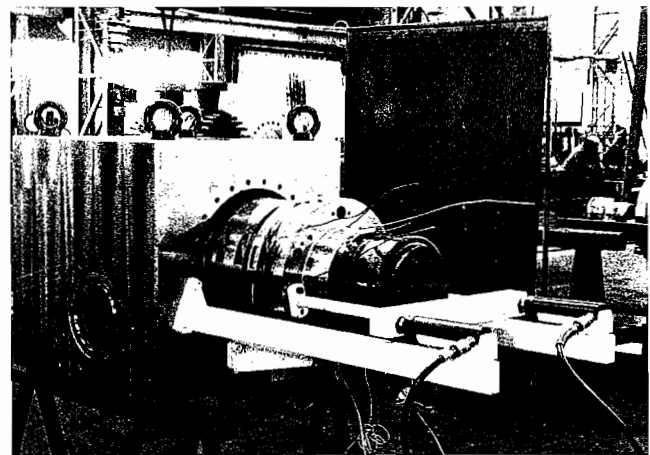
Extracting of the Inner Diaphragm and Rotor Cartridge Assembly.
